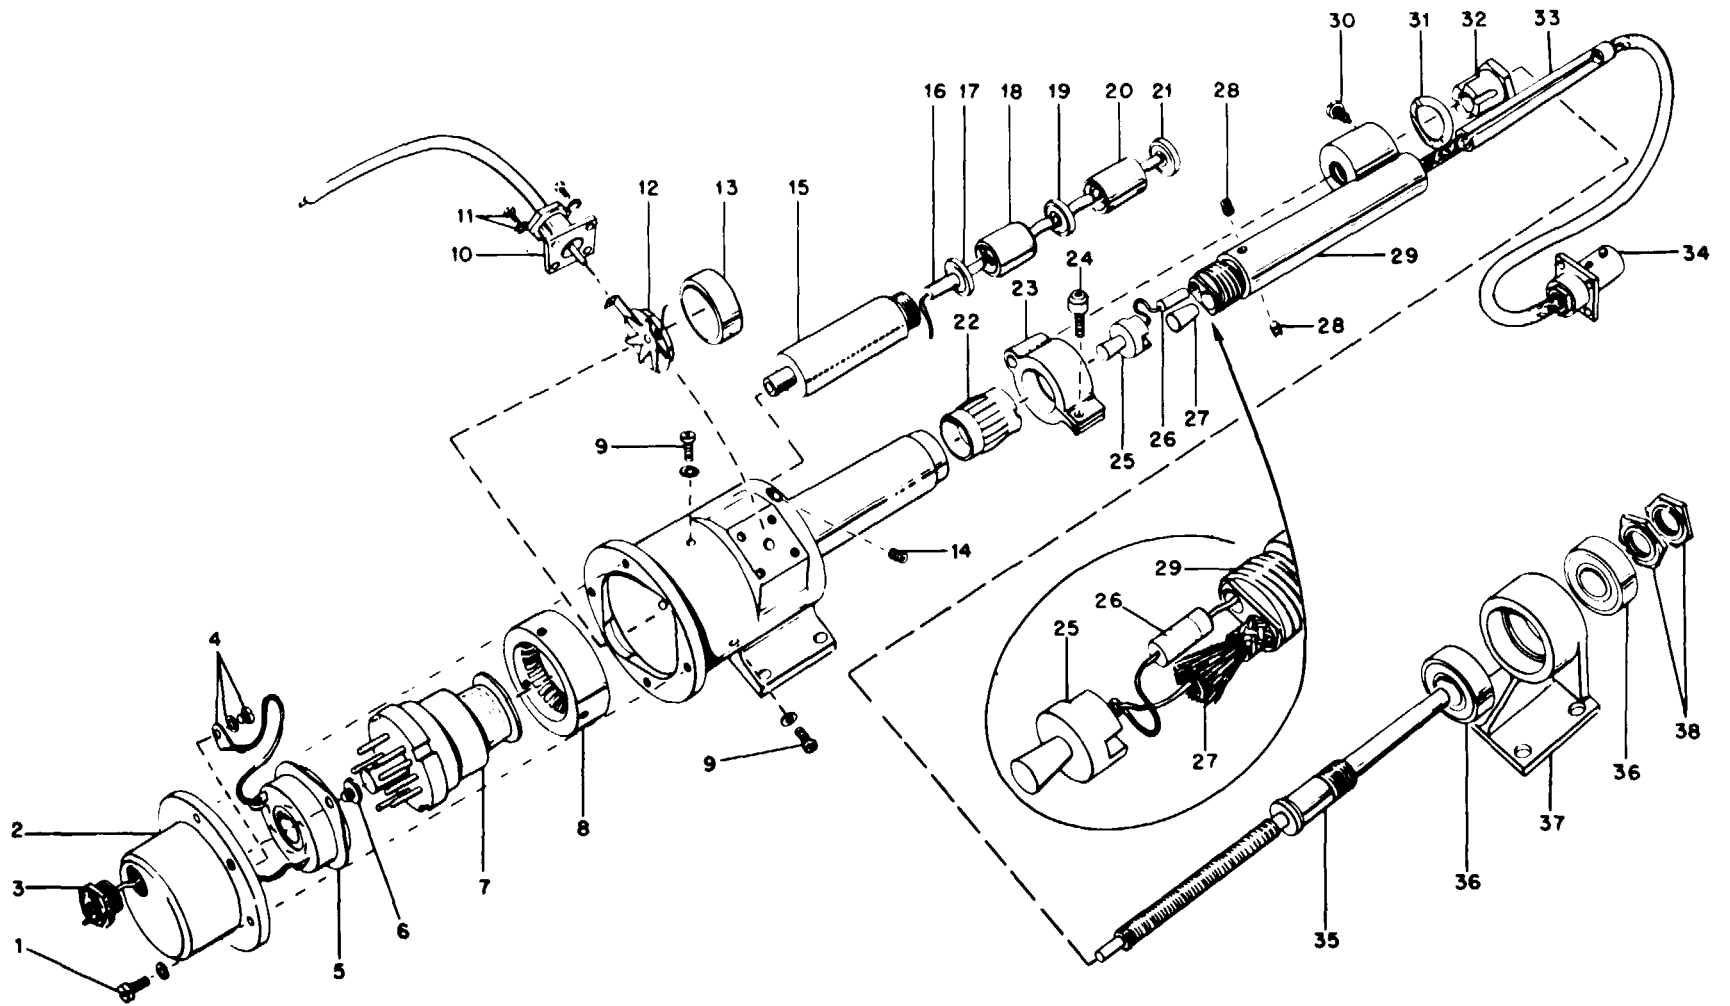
ALC/Attenuator Assembly 8A2, Exploded View
